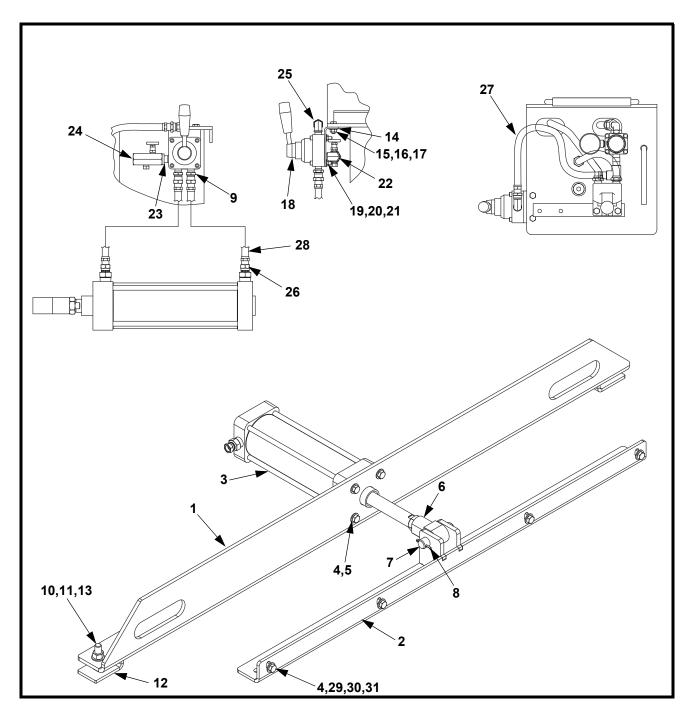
Pneumatic Aligner Assembly, P/N 34140-XX
